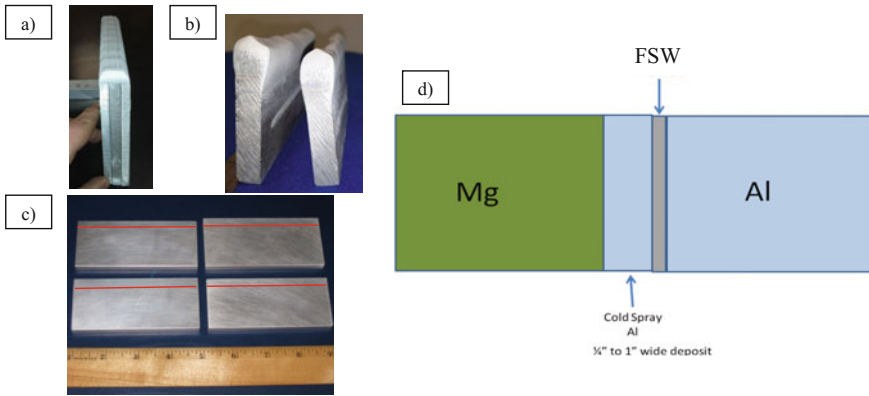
Shows how the samples were prepared to enable cast ZE41A Mg to be joined to wrought 6061 Al by a combination of the cold spray process and friction-stir welding. a Samples of cast ZE41A-Mg coated on one edge with 6061 Al cold spray at SDSM&T, b samples produced at UTRC, c Finished machined samples of cast ZE41A-Mg coated with 6061 Al cold spray (*Red lines* denote the Al/Mg interface), and d the welding schematic
